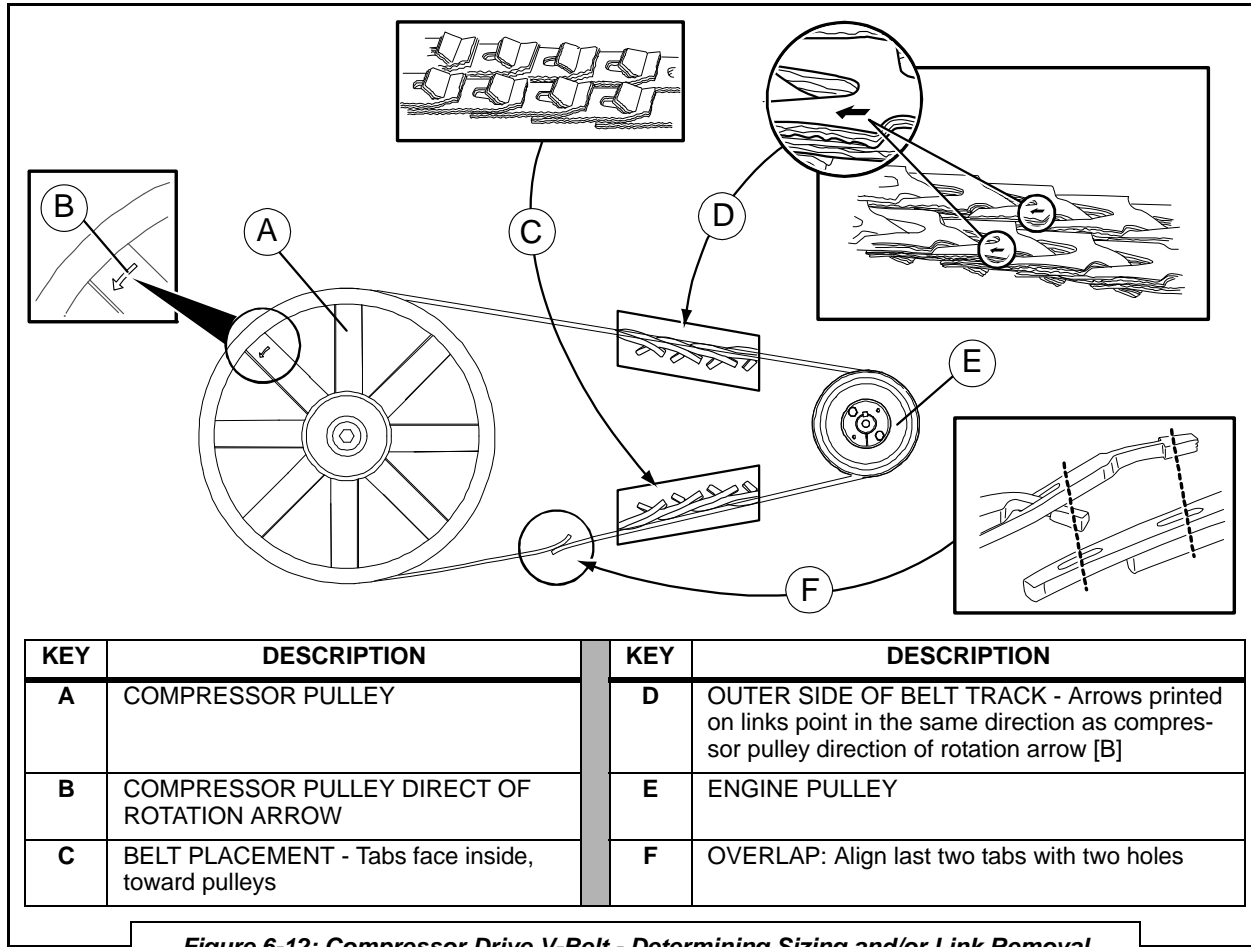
Compressor Drive V-Belt - Determining Sizing and/or Link Removal
